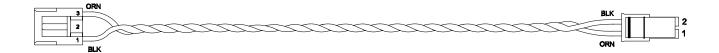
VLX3 Wash 36VDC Supply Cable Assembly
